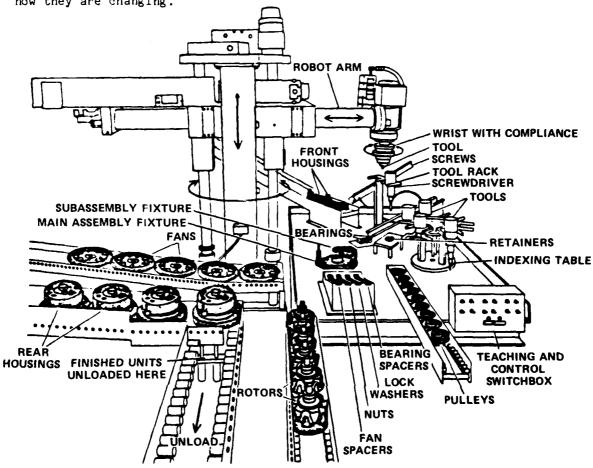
Robot Assembly Station at Draper Laboratory
